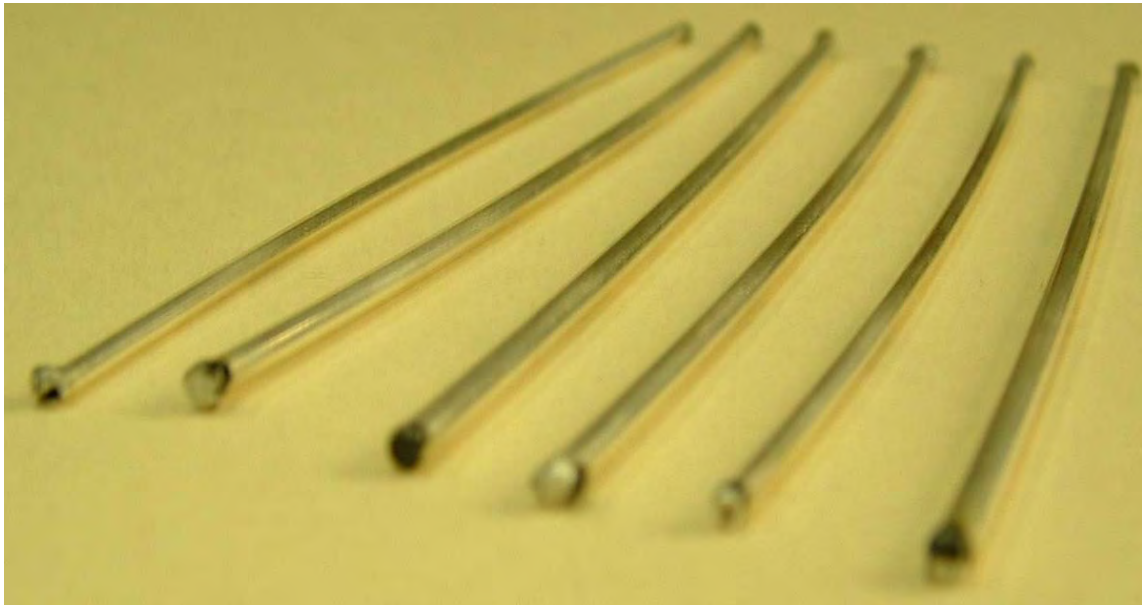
TIG welded mono and multifilament wire specimens before heat treatment.
